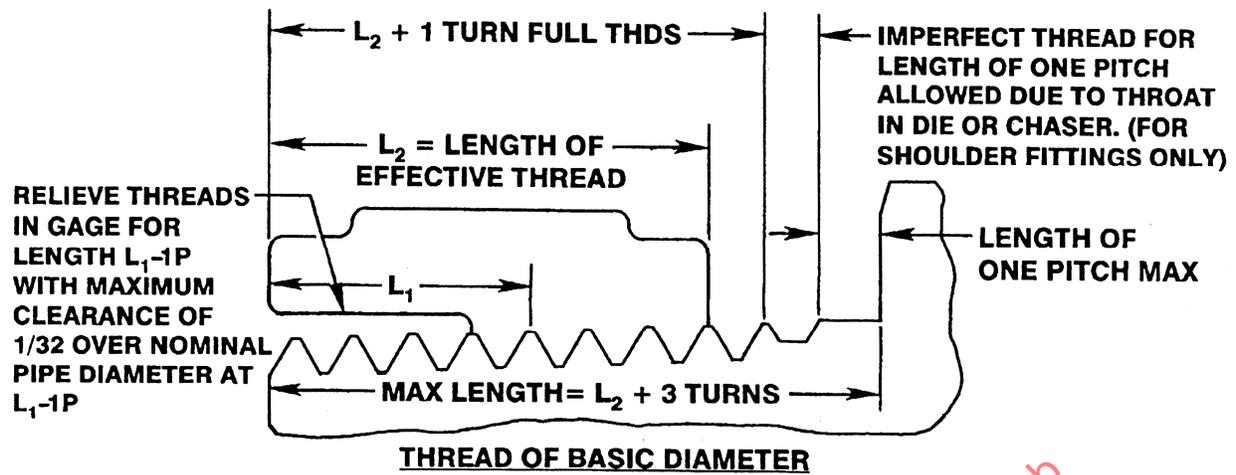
APPLICATION OF FULL RING TAPER THREAD GAGE
